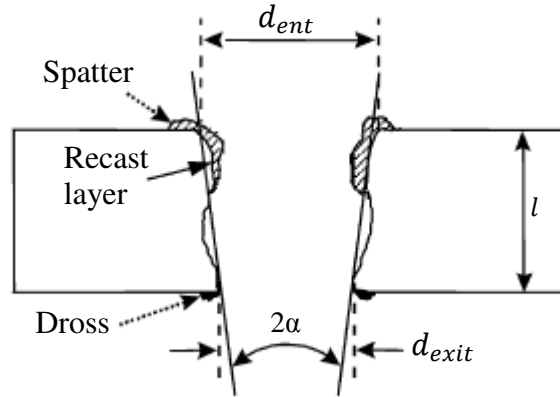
Illustration of laser drilled hole, here α is the hole taper [102].
